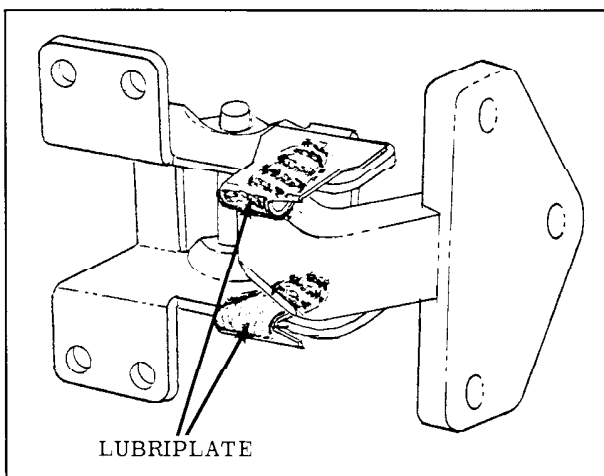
Front Door Hinge and Hold Open Assembly
